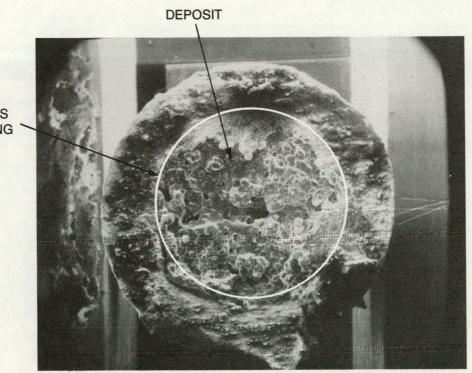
Cross-Section of Failed 304SS Adapter Tube. Tubing Is Plugged with Hard Deposit.
